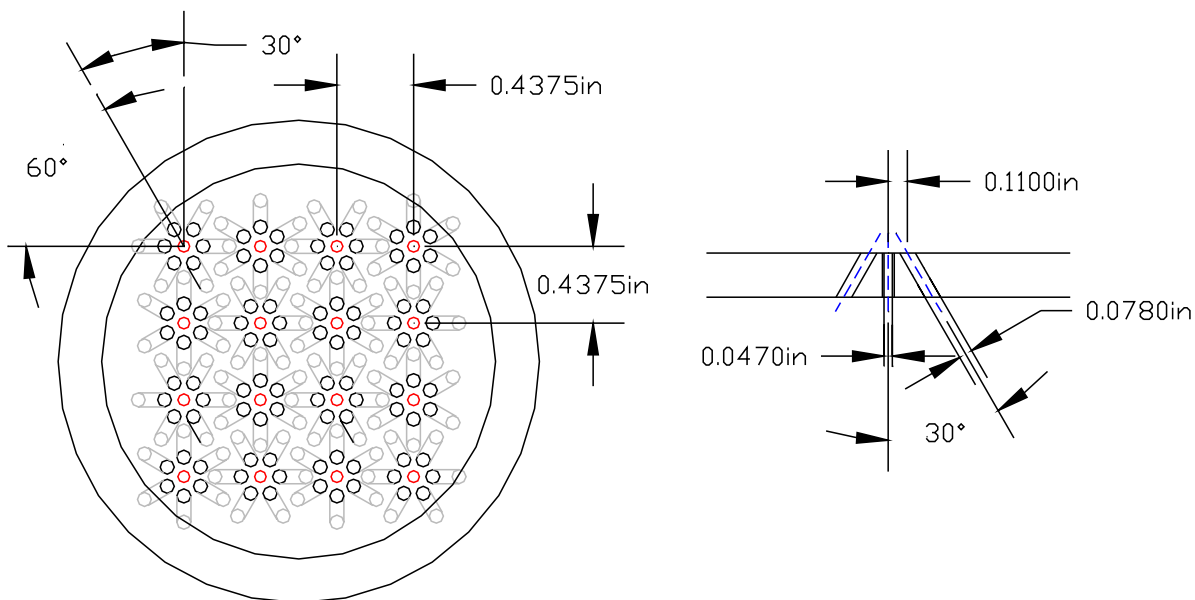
PDE injector with 16 impinging elements. Each element consists on one centered fuel hole and size angled oxidizer holes.
